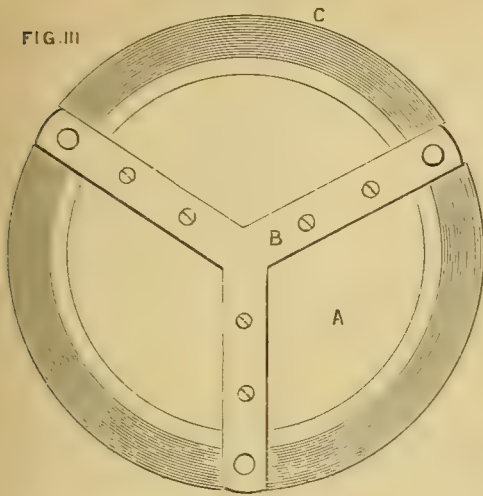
FIG. III.—BACK VIEW OF MIRROR CELL—A, Mirror Cell; B, Forging to connect it with C, which is a ring at bottom of Telescope Tube. FIG. 112.—ARRANGEMENT FOR ADJUSTING MIRROR CELL AND SPECULUM—A, Mirror Cell; B, Three-armed Forging (see Fig. 111); C, Ring at End of Telescope Tube; D, Threaded Rod or Screw; E, Speculum in Cell; F, F', Nuts working on D; G, Cover for Speculum Cell.
